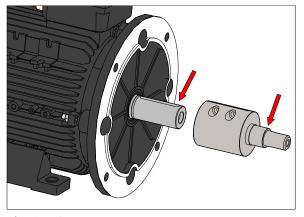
Degrease the motor shaft and pump shaft before assembly.
